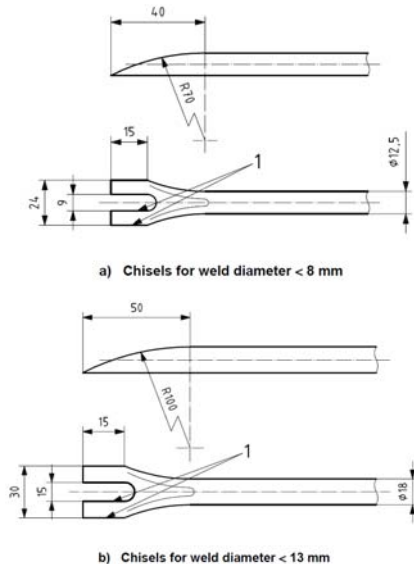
Chisel routine test on resistance spot and protection welded joints.
